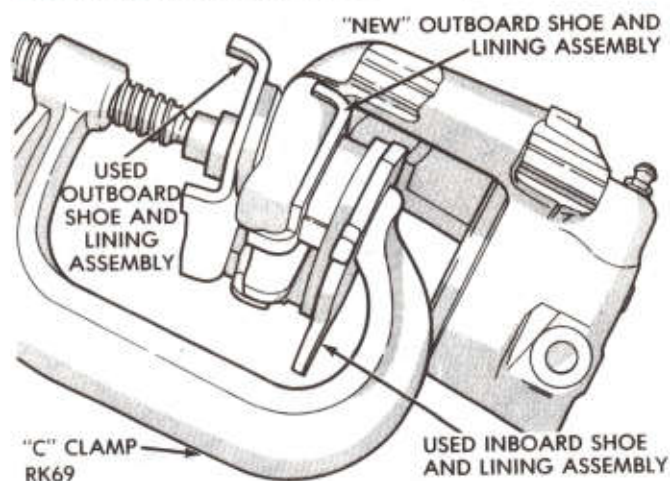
Attaching Shoe to Caliper Fingers with "C" Clamp
